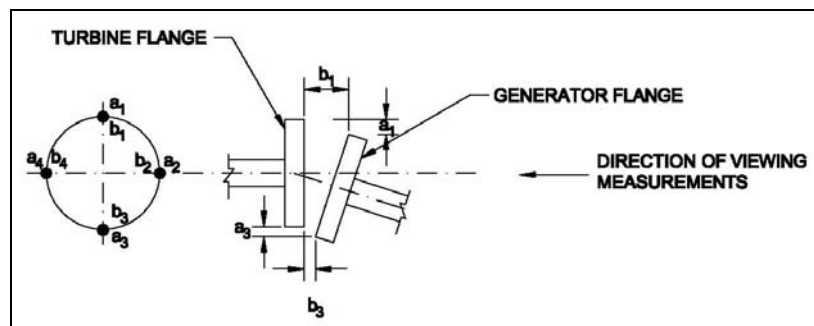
Showing Misalignment of Turbine Shaft and Generator Shaft of Horizontal Unit (Source R4)
